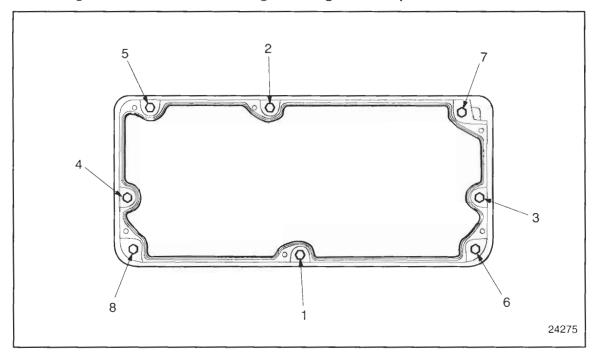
Rocker Cover Base Bolt Tightening Sequence
